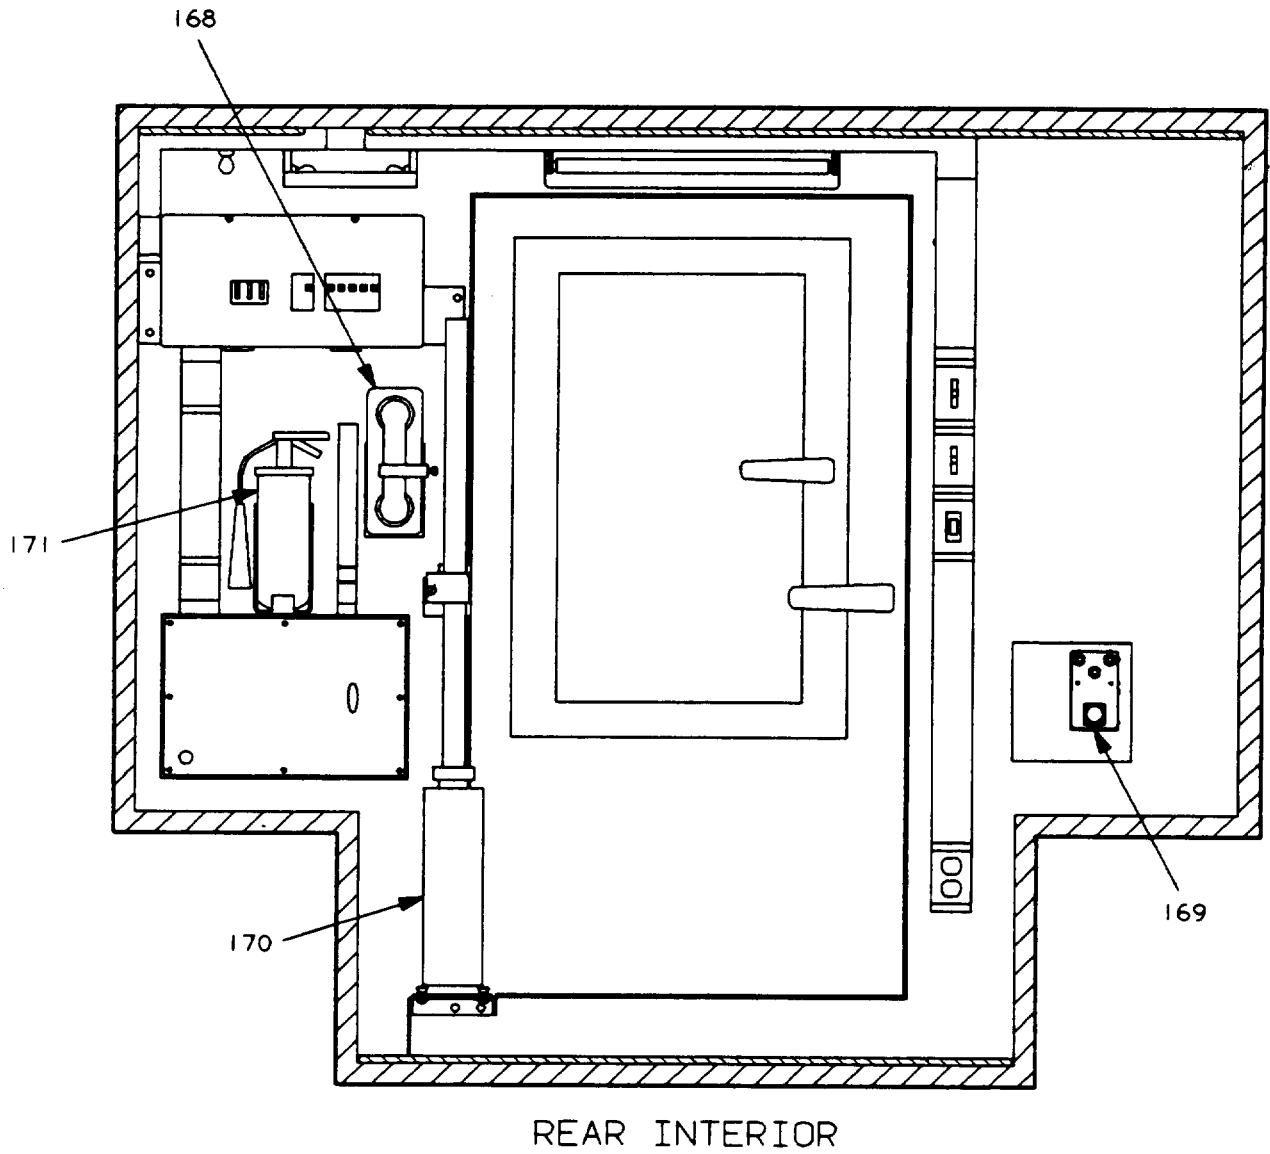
SHELTER ASSEMBLY (SHEET 13 OF 24)
